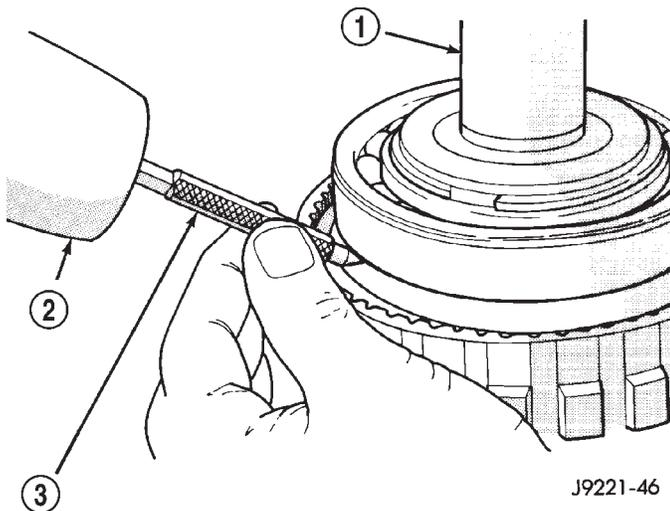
Clutch Drum Outer Retaining Ring Removal
